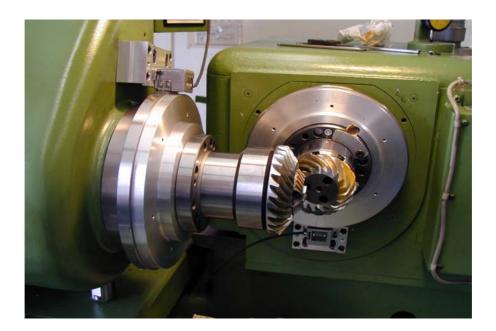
Close-up of a gearset showing the location of the rotary incremental encoders as well as contact image patterns on the tooth surfaces.
